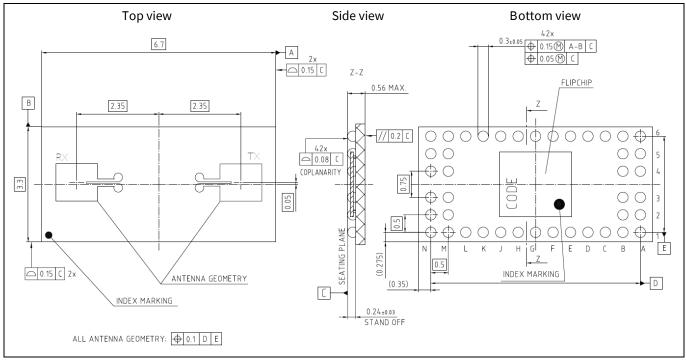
Top, side and bottom views of the BGT60LTR11AIP MMIC package - all dimensions in mm
